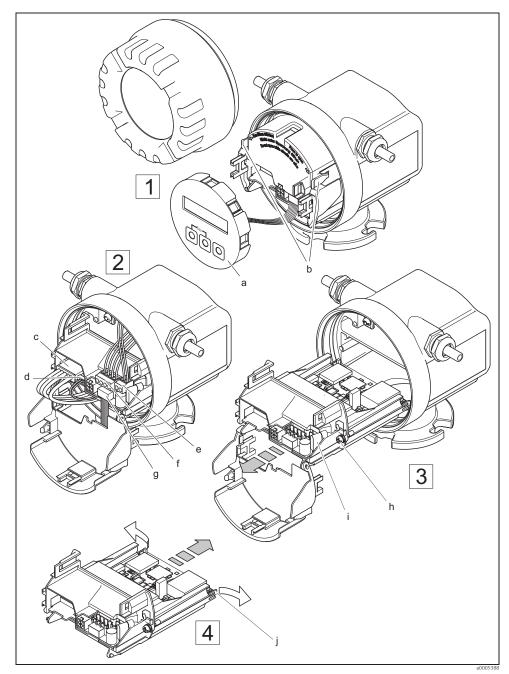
$Field\ housing: removing\ and\ installing\ printed\ circuit\ boards$
